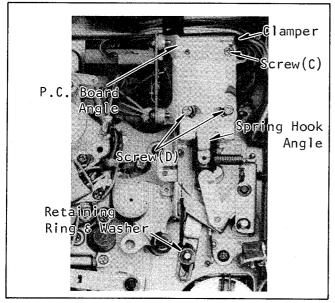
Replacement of Pressure Roller Solenoid-(2)
